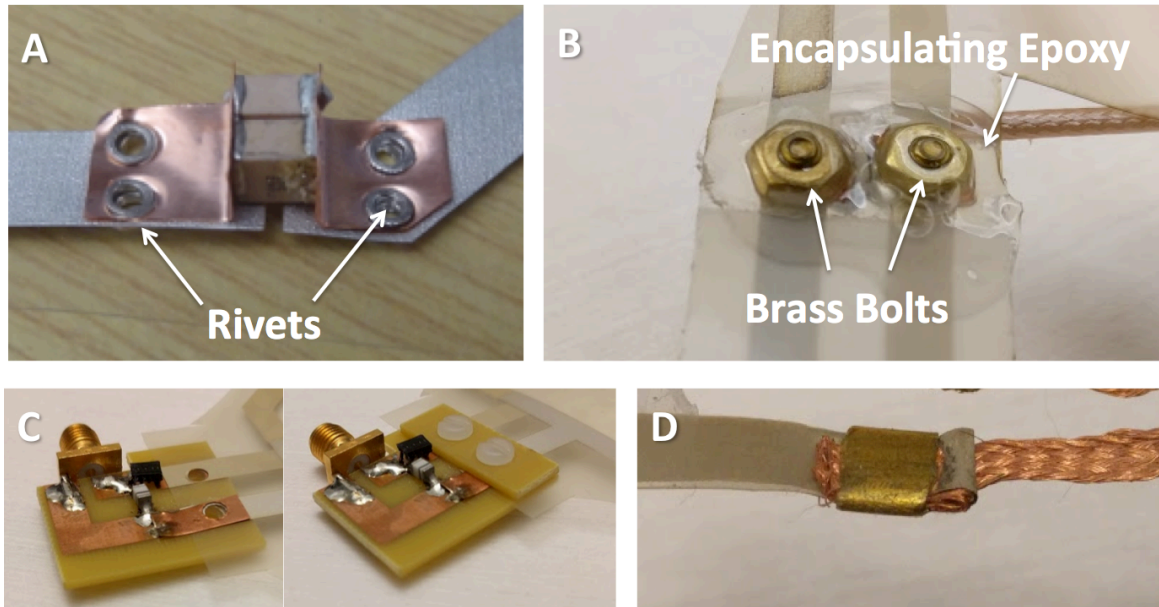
A. Photograph showing copper strips riveted to the printed coil. B. Photograph of the brass bolts clamping the coaxial cable to a printed coil C. Photographs showing the clamping board interfacing between printed and non-printed components for a single coil testing. A thin copper strip is soldered onto the board to make the top contact to the coil. D. Close up photograph showing the brass crimp used to join the printed array to the coaxial cables and copper braid.
